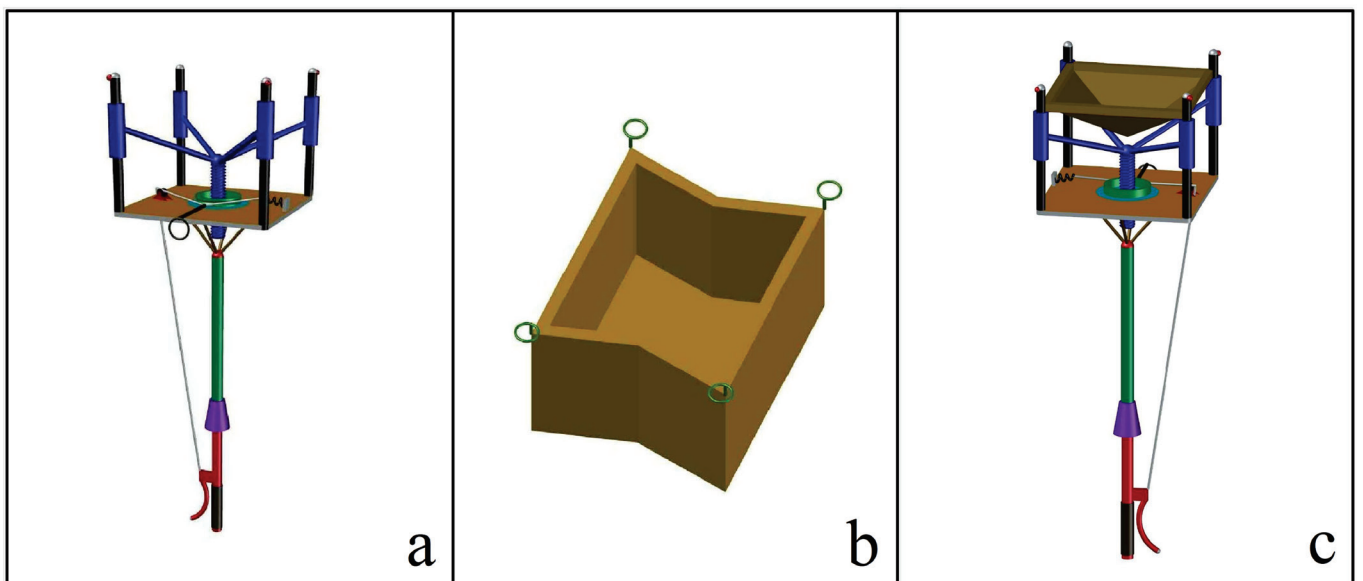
The 3D design of the fruit bagging apparatus: (a) fruit bagging apparatus; (b) paper bag; (c) fruit bagging apparatus with paper bag
